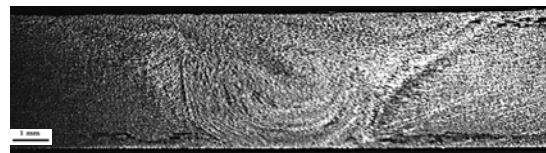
AA2198-T8 welding macrostructure (2400rpm – 1000 mm/min – 9,5 KN)
